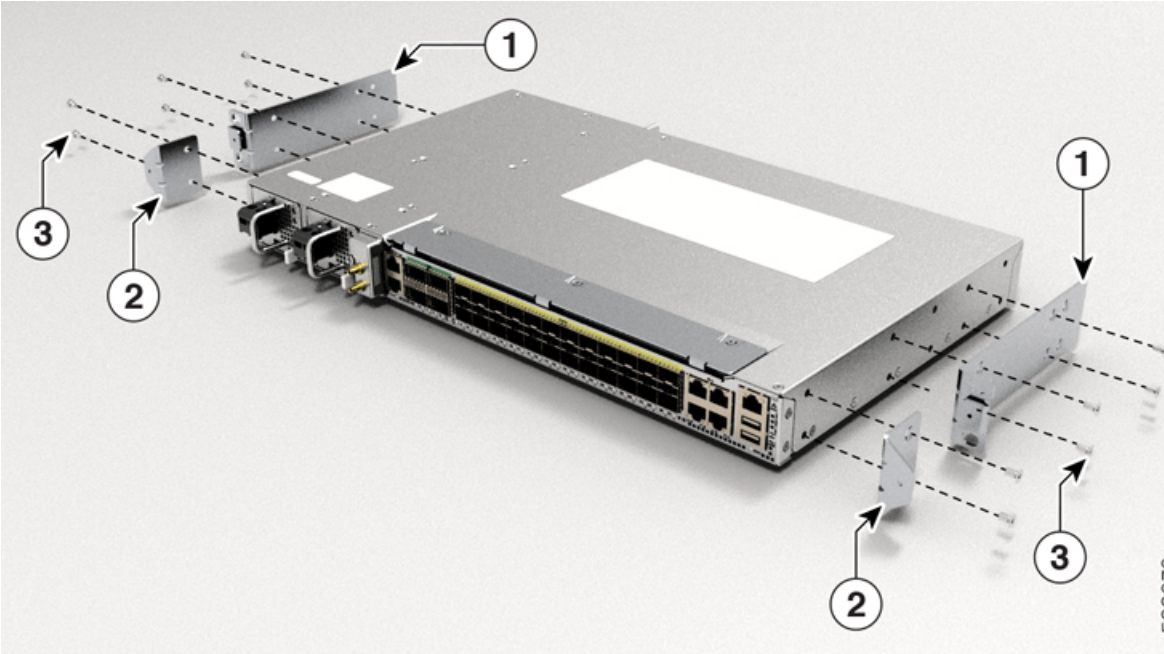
Installing Cable Management and 19 inch Rack-Mount Brackets in the Front
